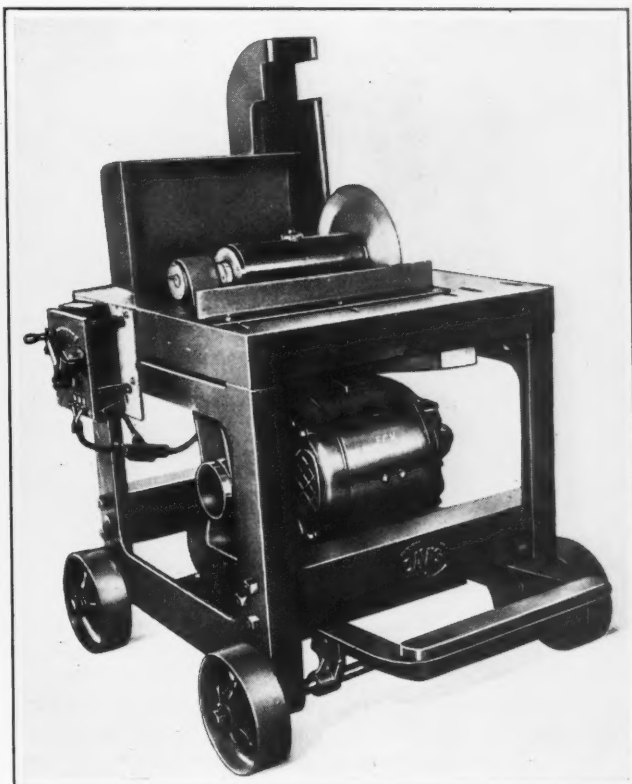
Motor-driven Tube-cutting Machine having an Oscillating Head
